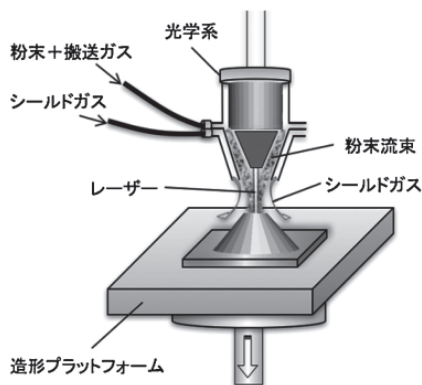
Appearance of Additive Manufacturing equipment by DED⁵⁾
